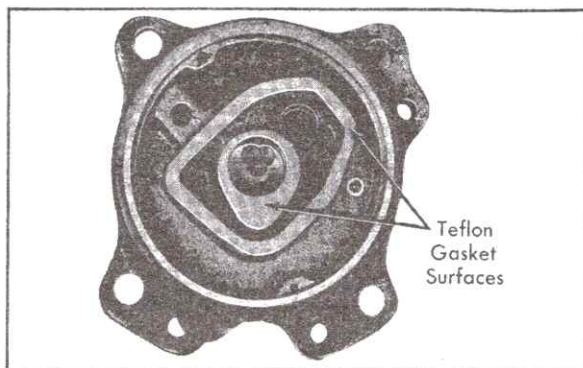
Teflon Gasket Surfaces on Rear Head
